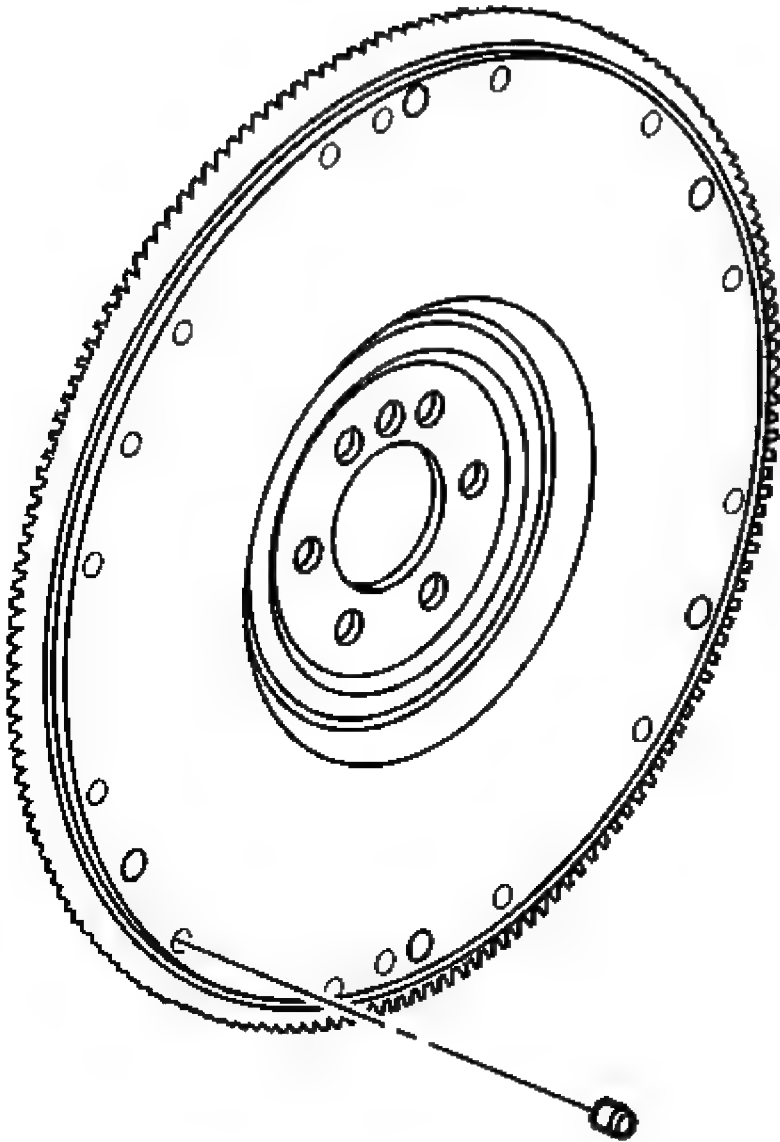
Locating Flywheel Weights (Manual Transmission)
